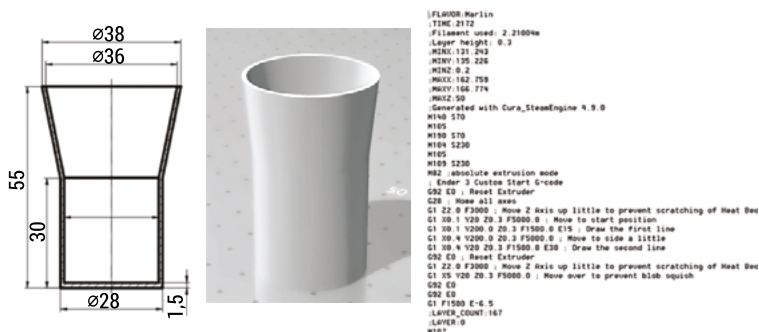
Drawing and fragment of the G-code for the manufacture of a container nest on a 3-D printer
